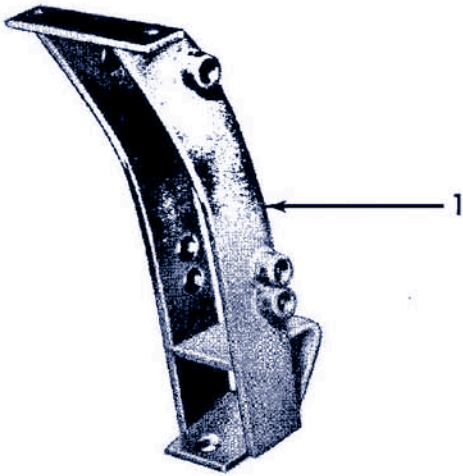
Bracket Assembly - Dozer Blade Mounting
